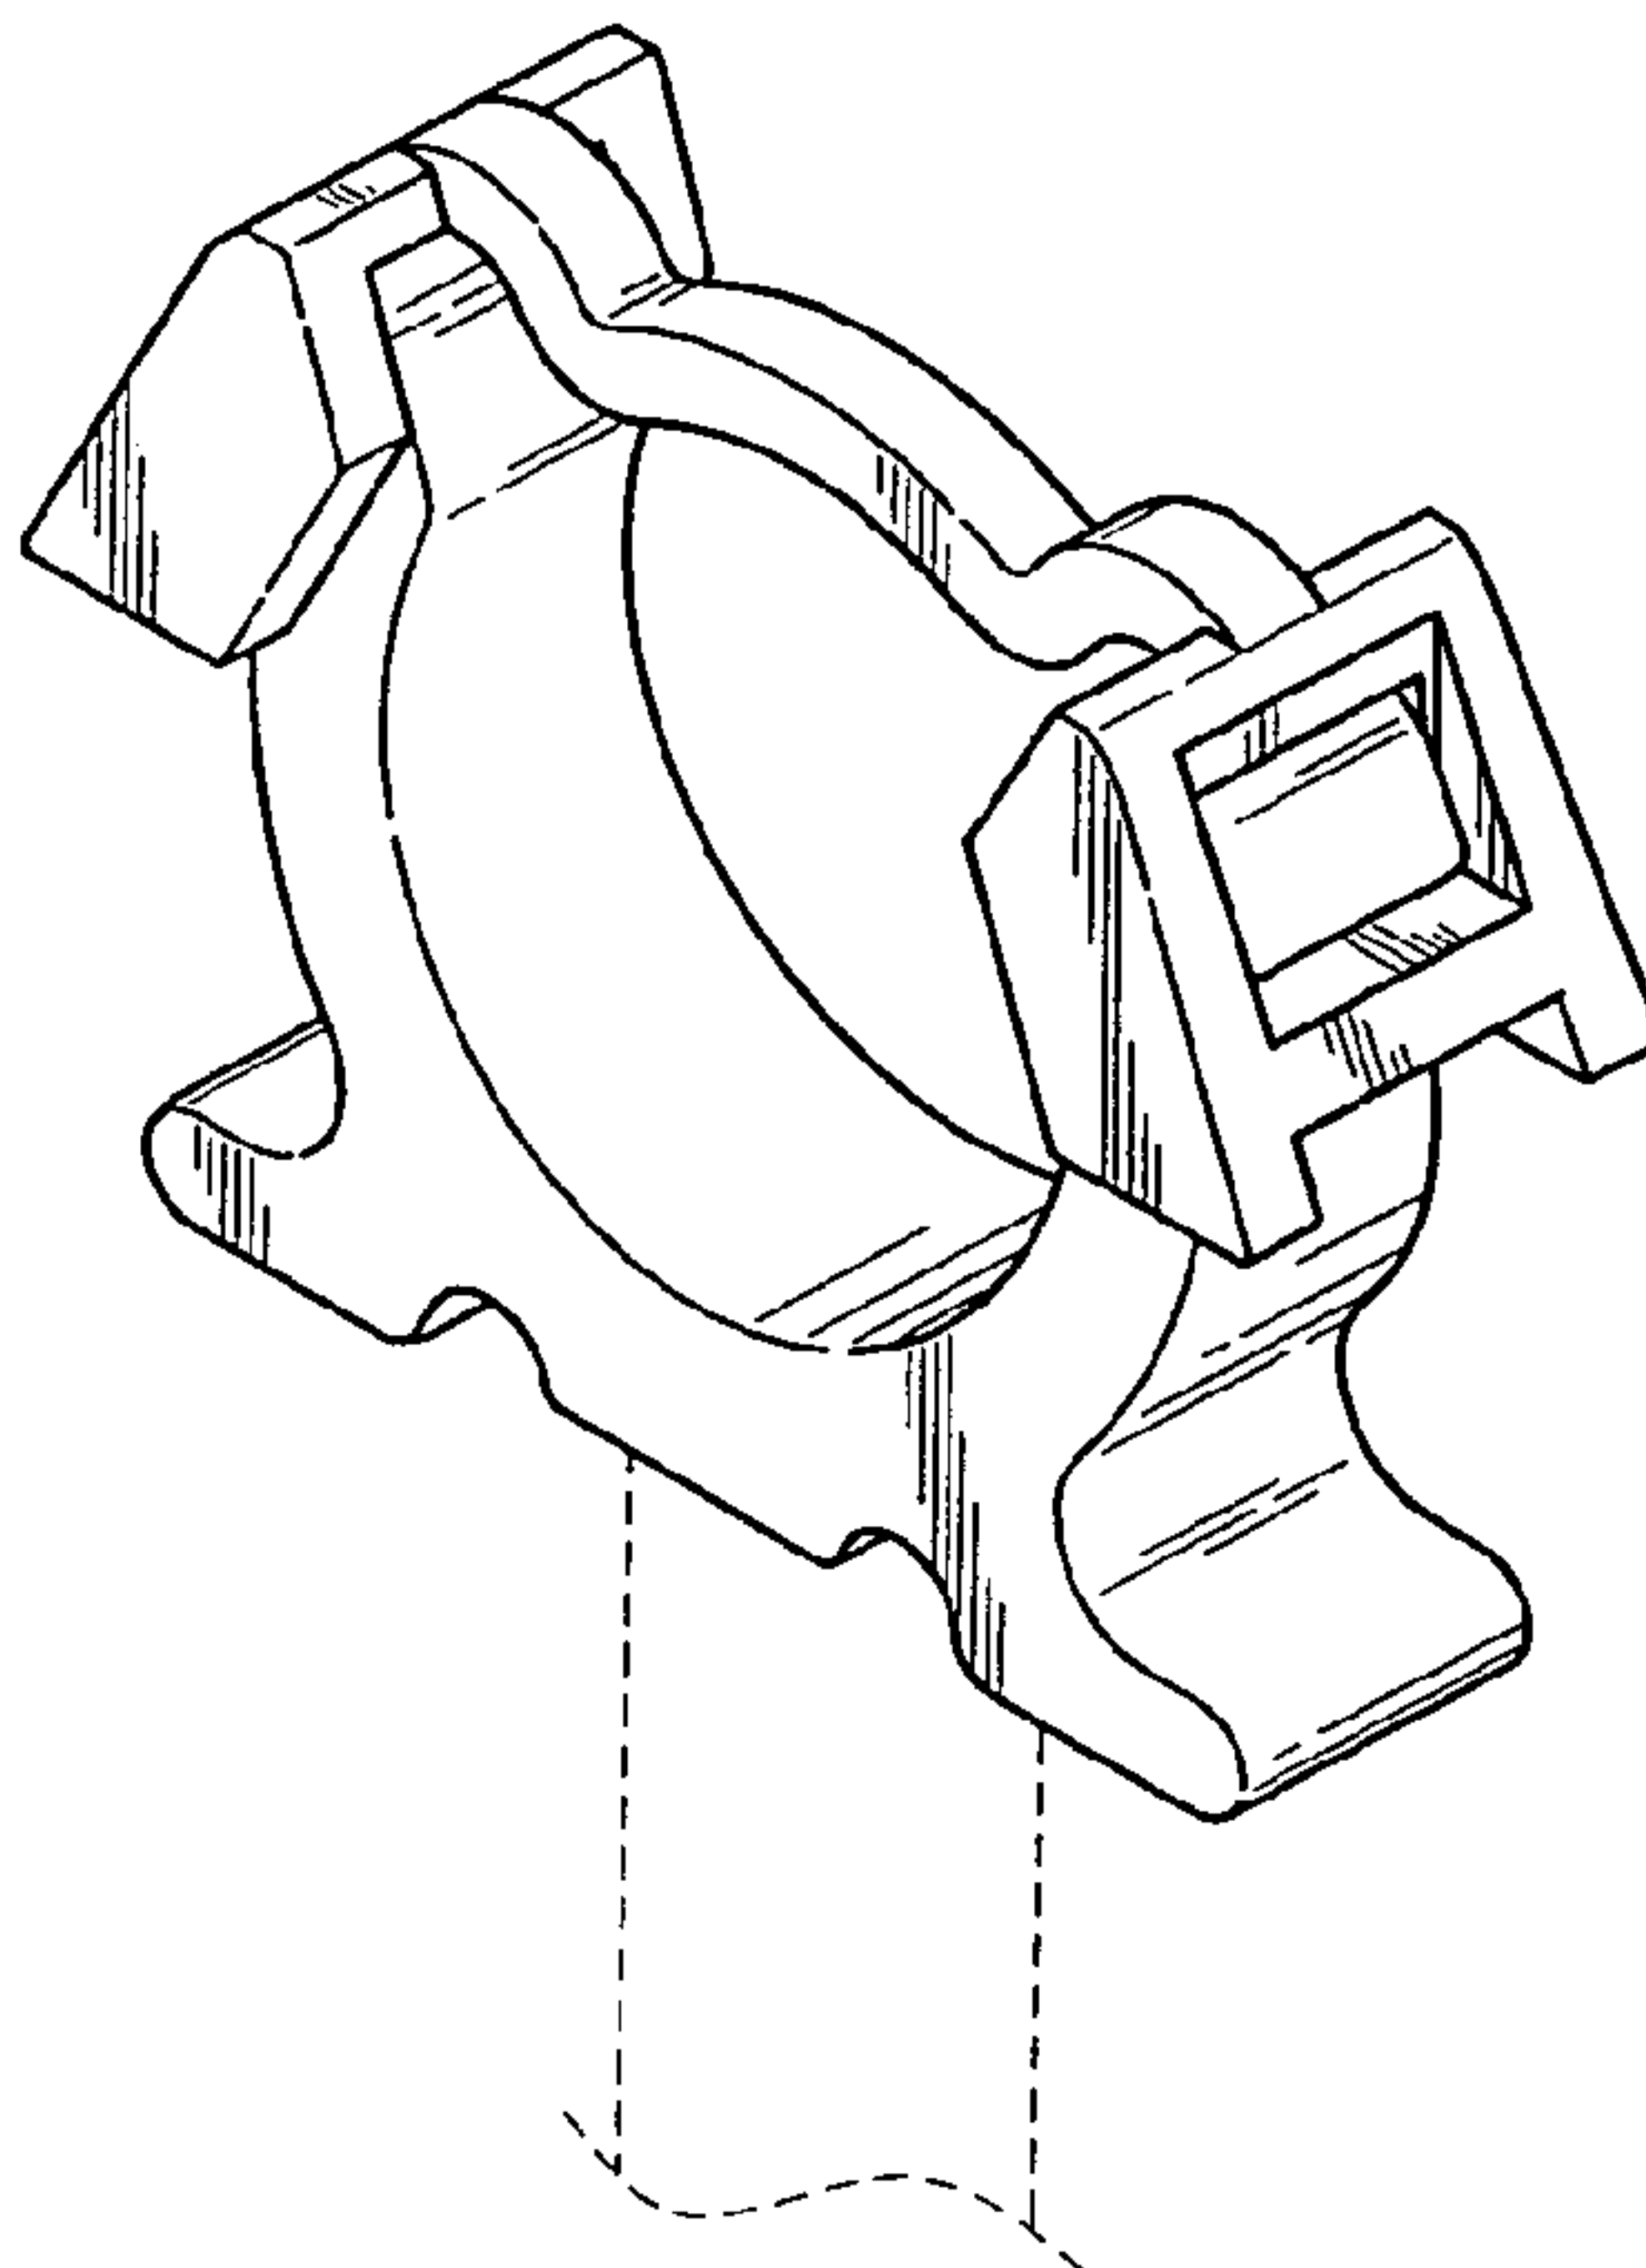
is a front view of the combined neon tube clip with the retainer cap.
